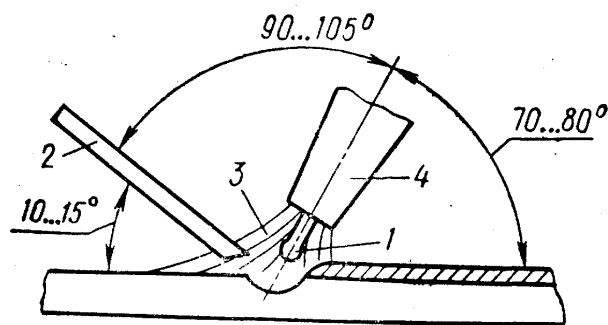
Placement of the torch and the filler rod in manual argon-arc welding:
